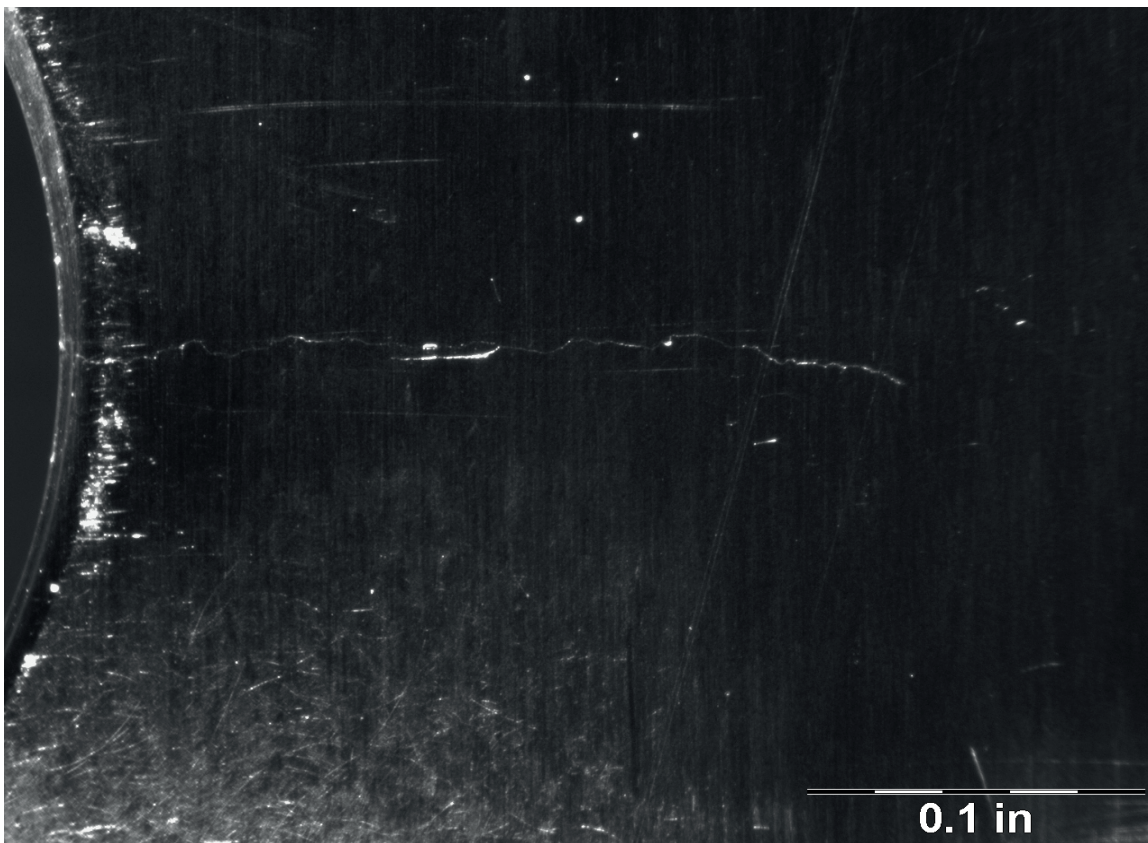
Image of Surface Crack in Coupon Cx4N1-07-B, Surface Crack Length is 0.2515 inch.
